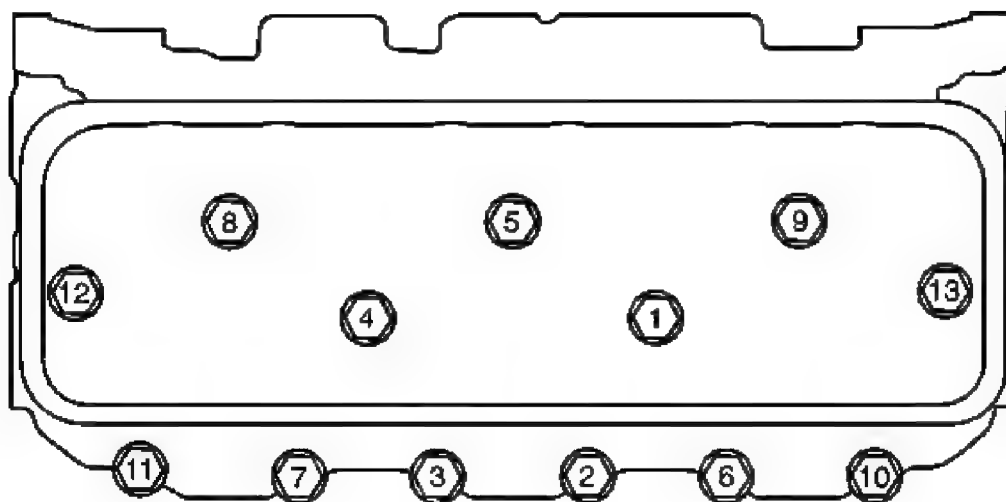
Identifying Cylinder Head Bolt Tightening Sequence
